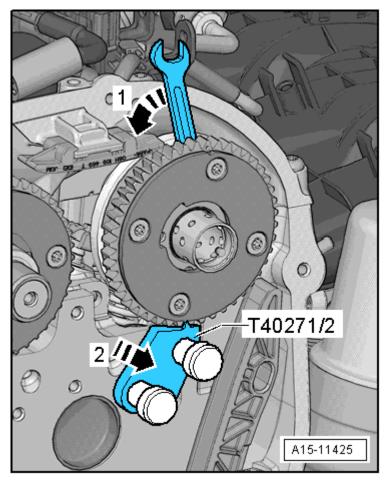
Turn Intake Camshaft With A Wrench In Direction Of Arrow
